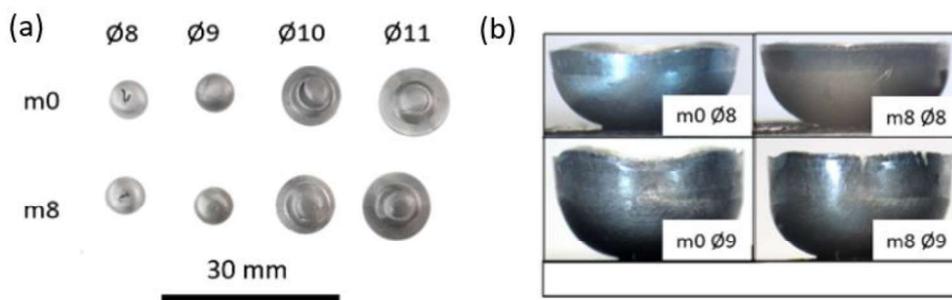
Blanks drawn in cup drawing test of initial material m0 and after I-ECAP processing m8 view from top and (a) side (b)
